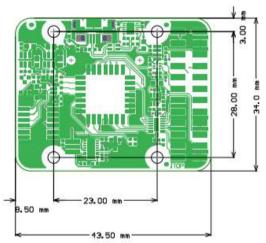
The outer dimensions of the MTi DEV Board. PCB spacers are placed
